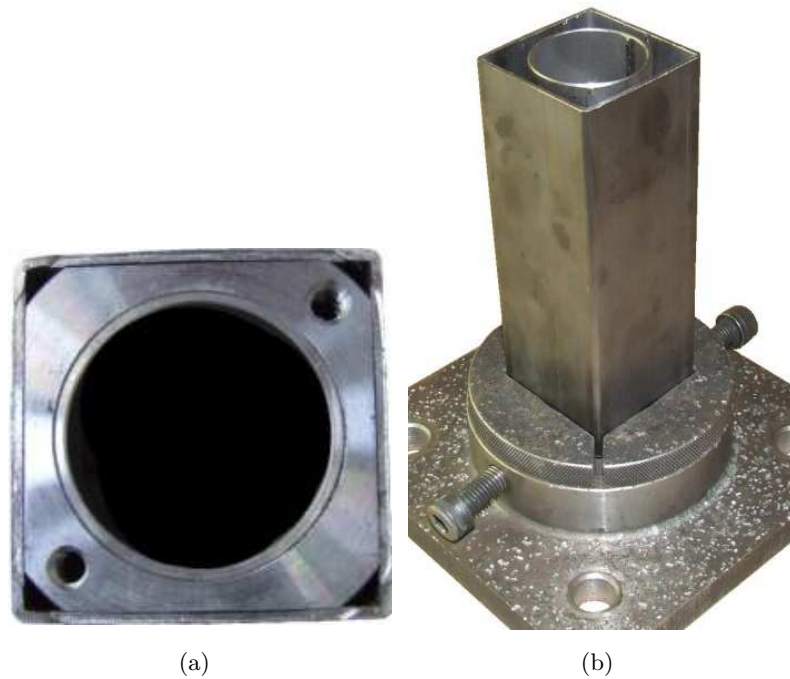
Example of (a) a tube locator and (b) specimen in the clamp (c38s50)
